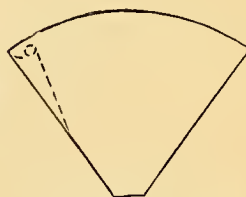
SHAPE OF PAPER FOR MAKING CONICAL FOOT.
